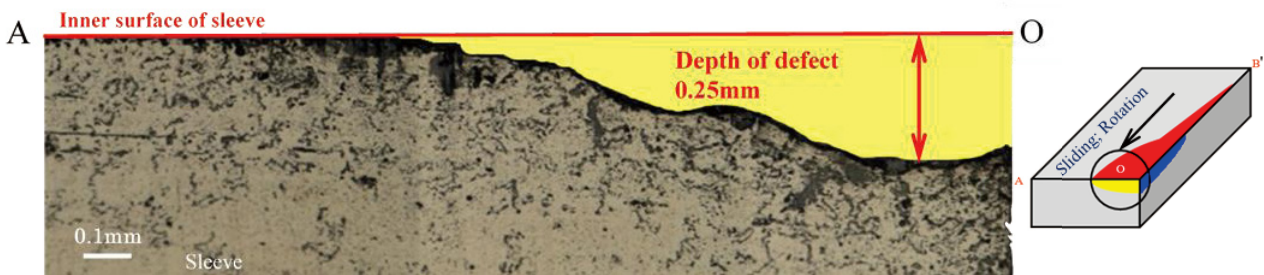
Cross-sectional observation of Adhesive defect ② at AO $\theta=const.$ of the sleeve in Fig.5 (a)
